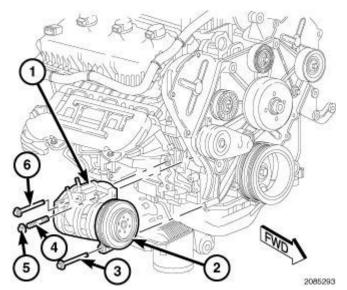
Removing/Installing A/C Compressor Courtesy of CHRYSLER LLC
